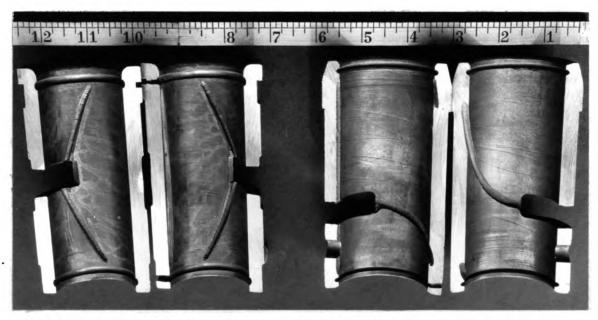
Lft.- Slanting Grooves Run Into Ring Groove Too High.
